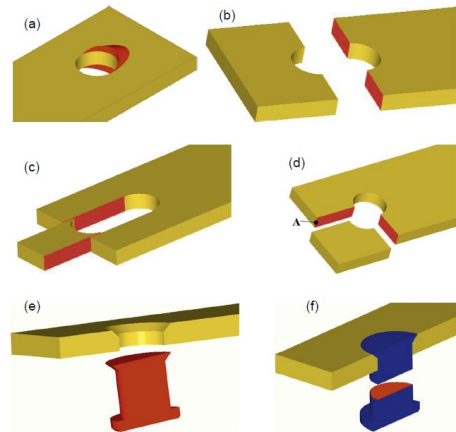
Failure modes in composite bolted joints: (a) bearing failure, (b) net-tension failure (c) shear-out failure, (d) cleavage failure, (e) fastener pull-through, (f) bolt failure [24].
